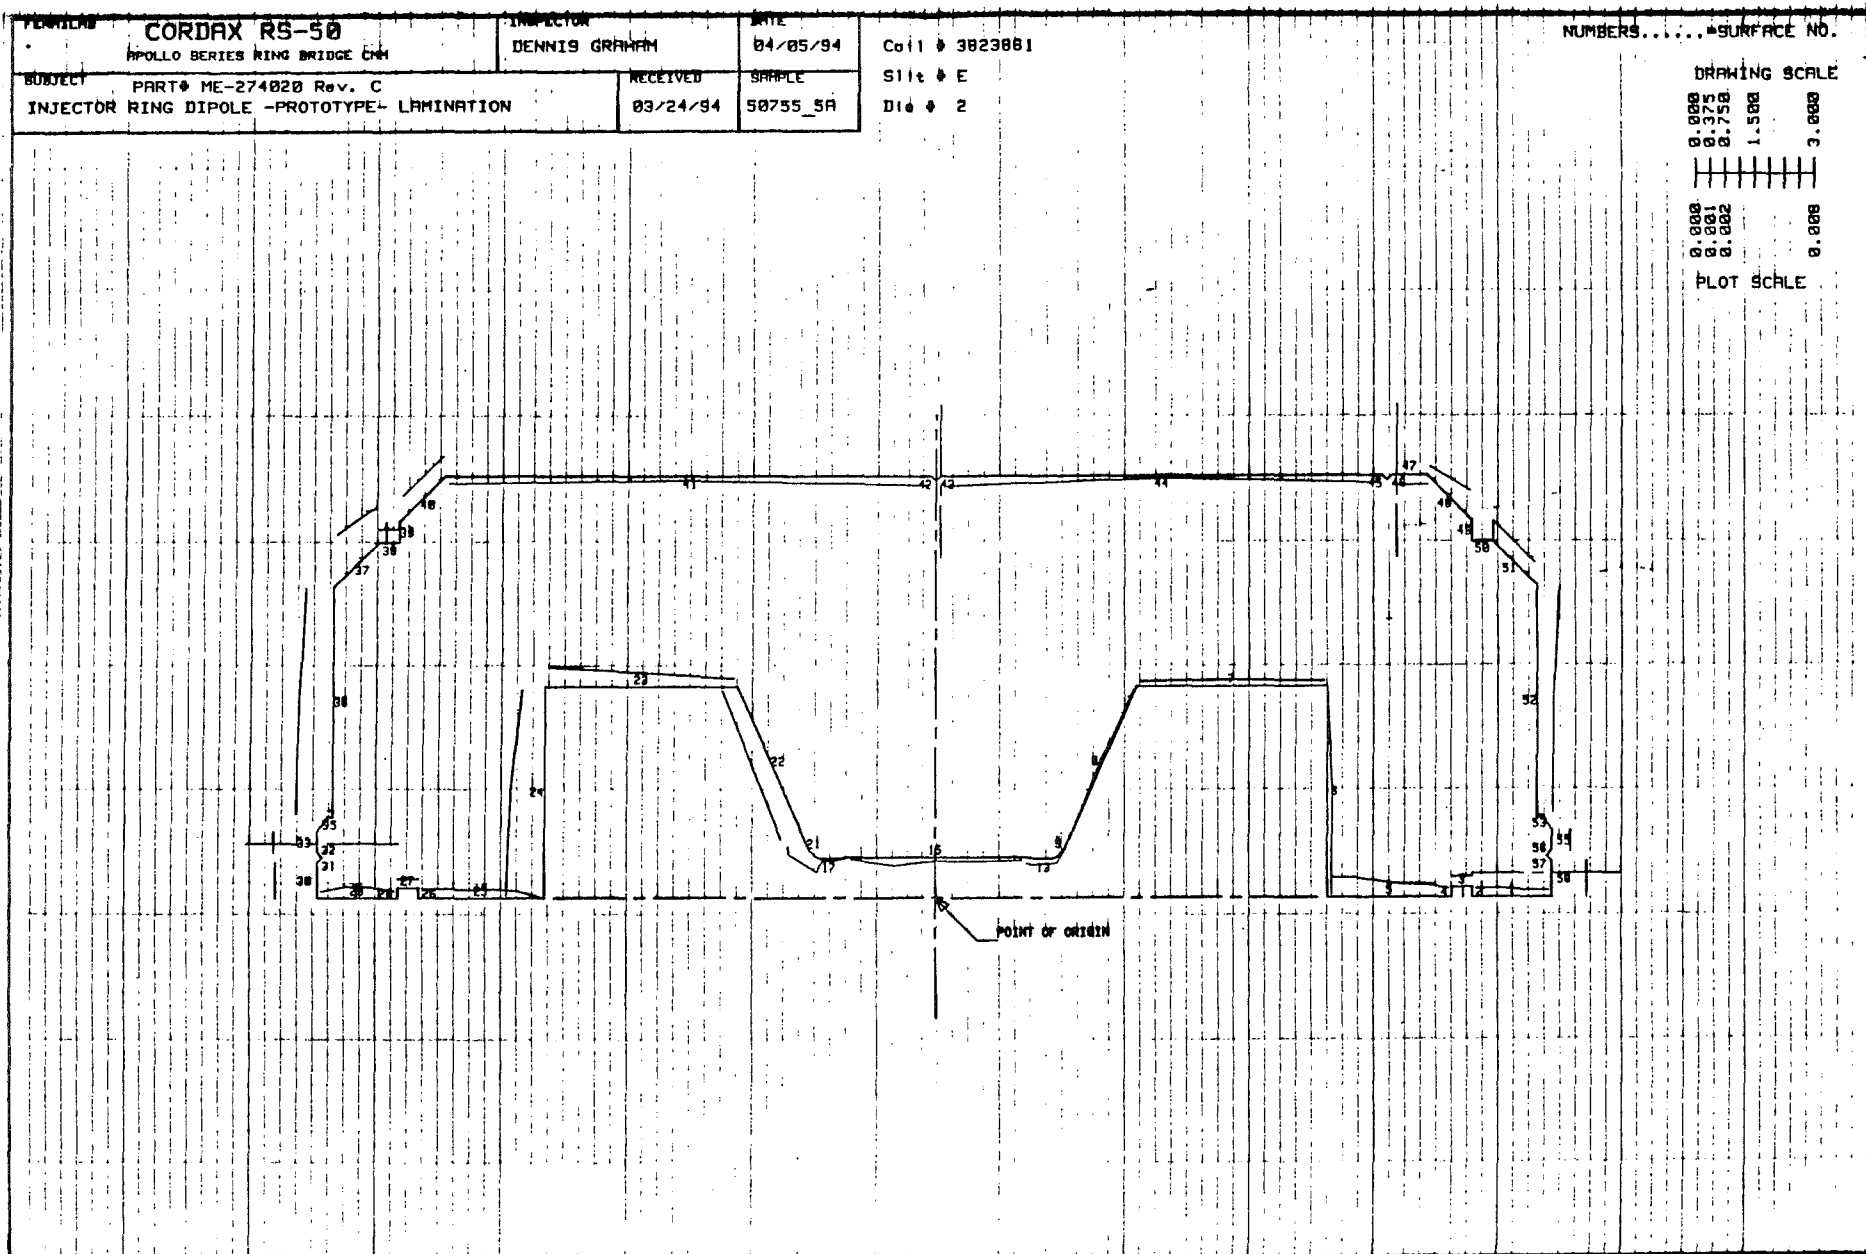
Typical Report from Coordinate Measuring Machine.
